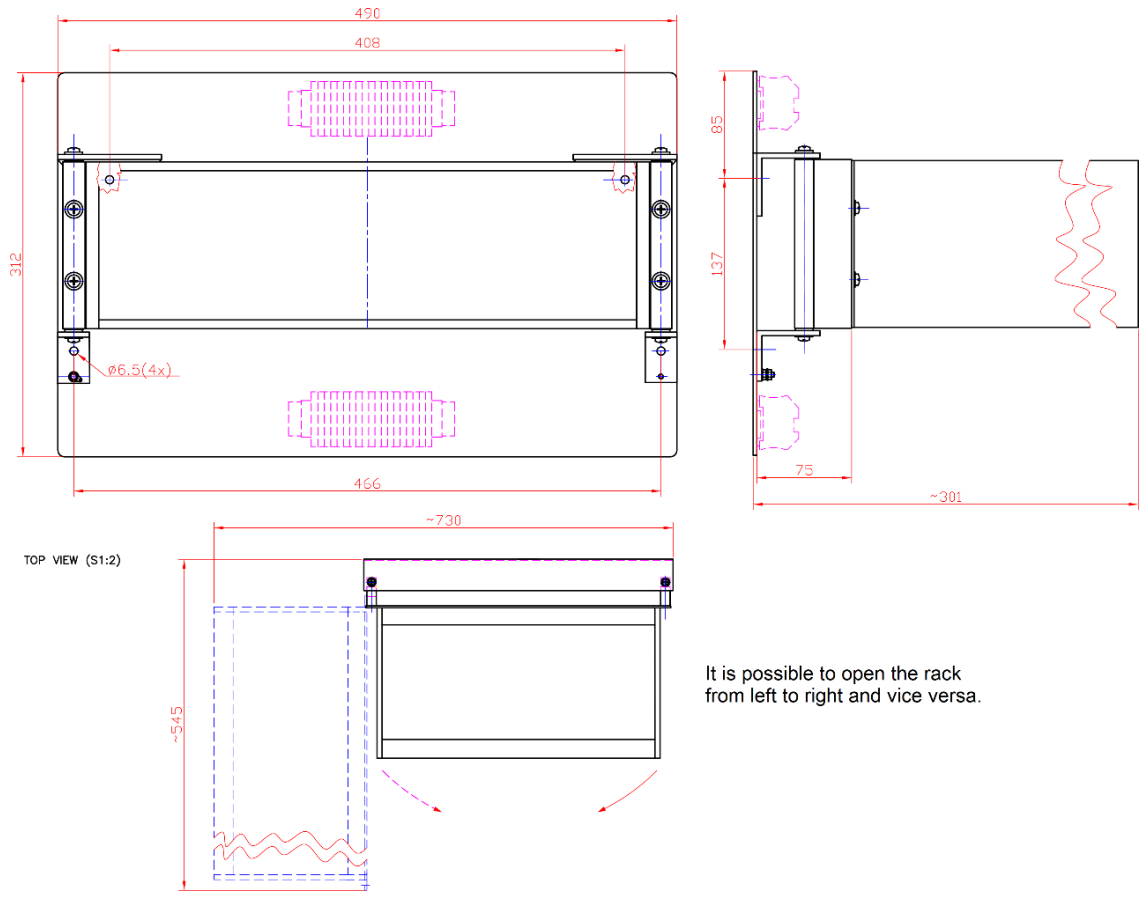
Dimensions for wall mounting of 84 HP devices (upper and lower terminals)
